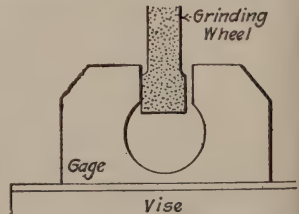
Shows a wheel relieved on the sides for "face grinding a snap gauge."
